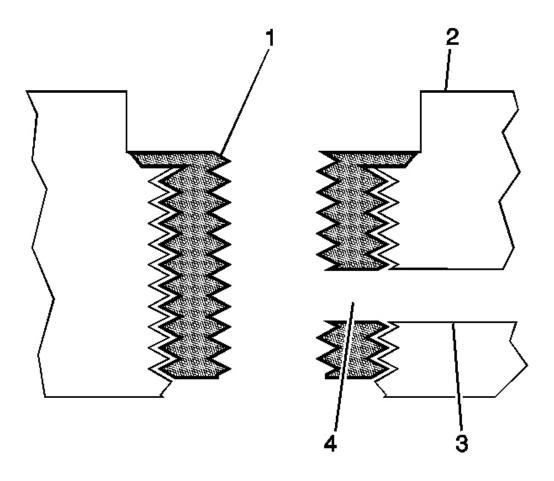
View Of Restricted Engine Coolant Passage - Recessed Thread Repair Courtesy of GENERAL MOTORS CORP.
